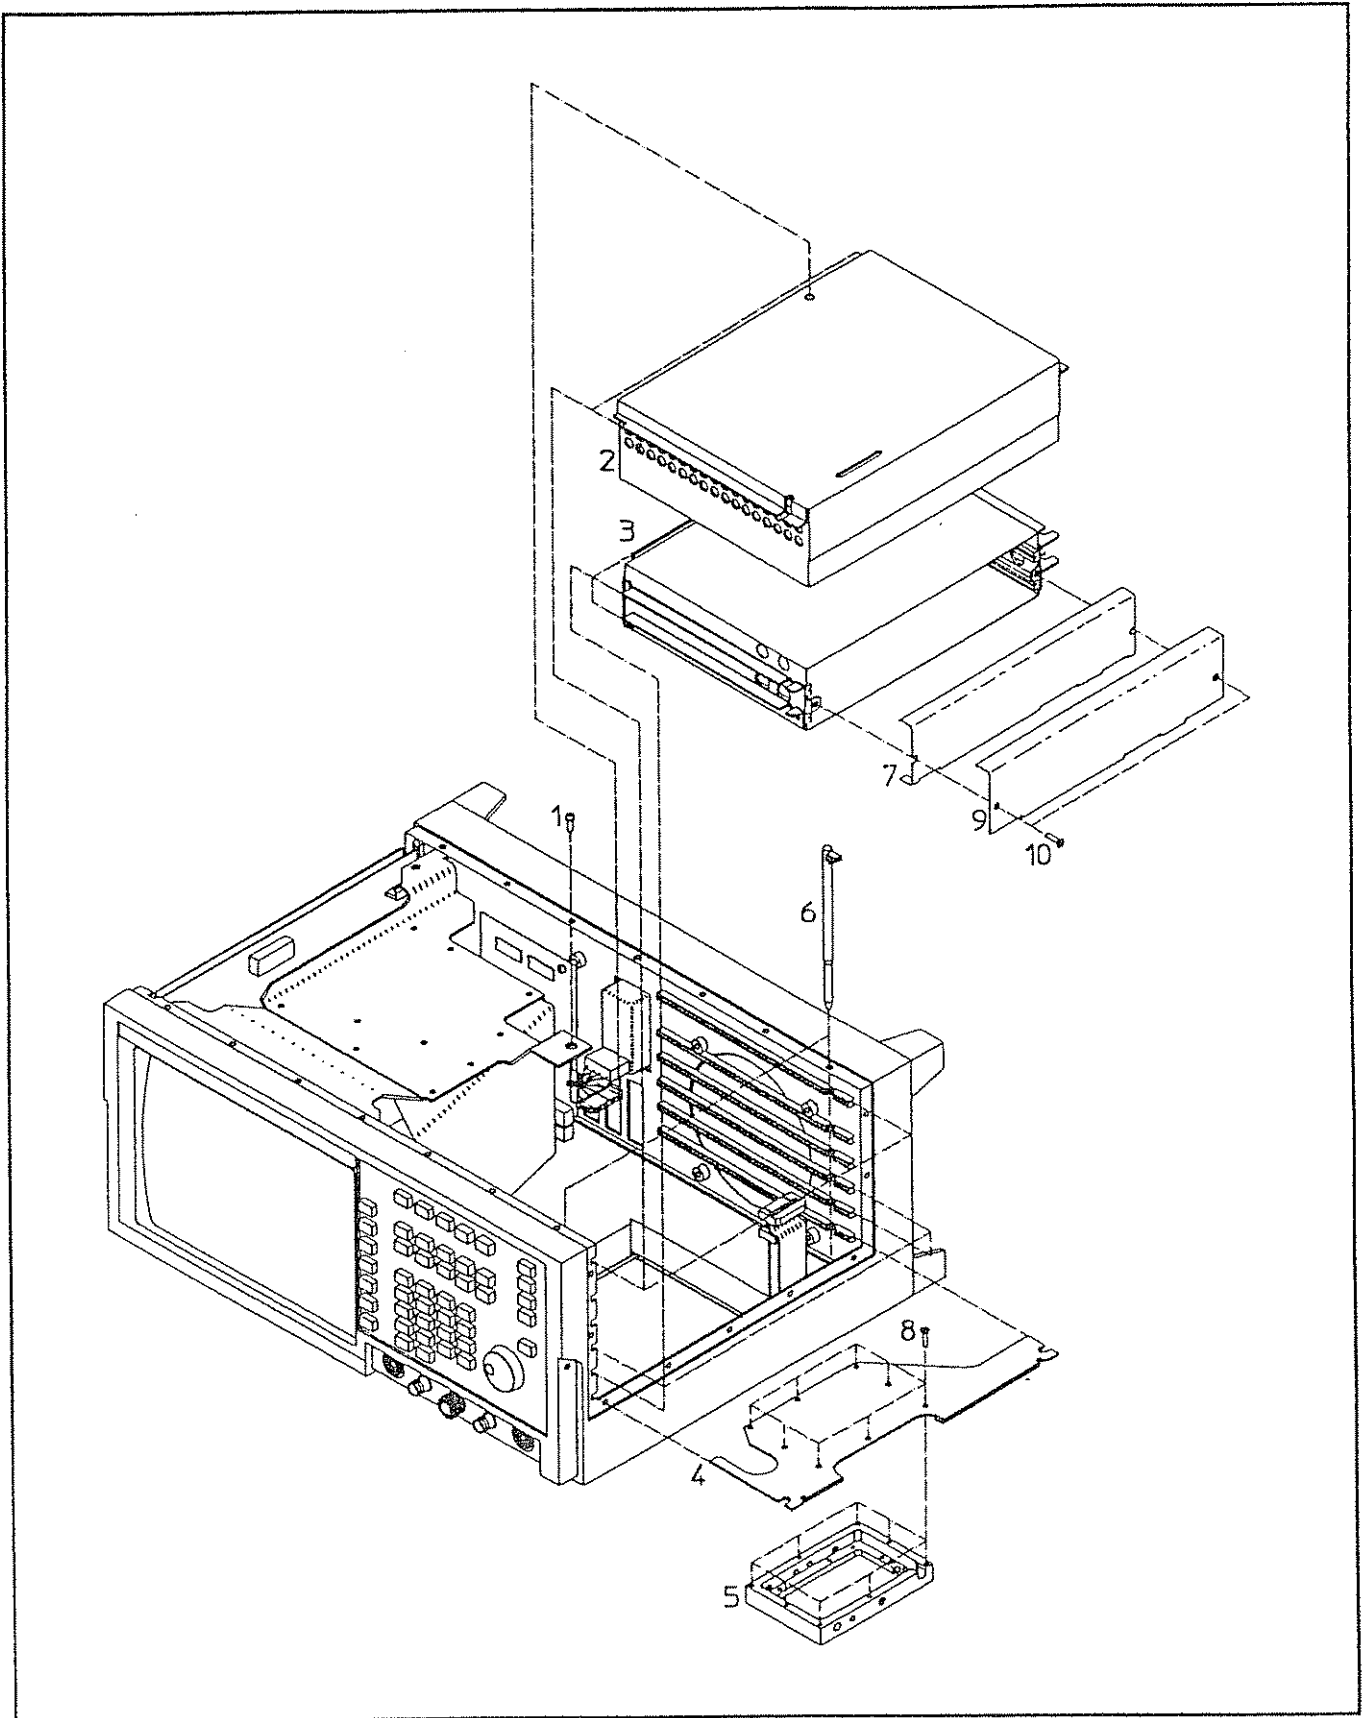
Power Supply, Baseband Housing, and Sensor Check Source Illustrated Parts Breakdown
